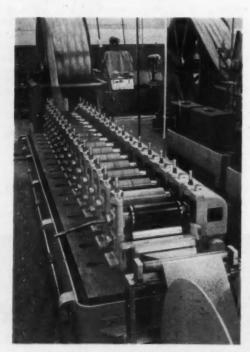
Forming the core for the sandwich requires 13 progressive rollers. Only 1/6 of the core is produced at one time to keep down the size of the roll forming machine.
